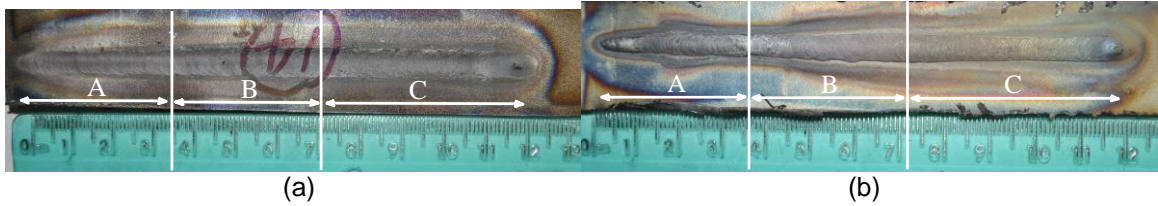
Front-side and backside weld bead appearances for arc length disturbance experiment. (a) Front-side weld bead; (b) back-side weld bead.
